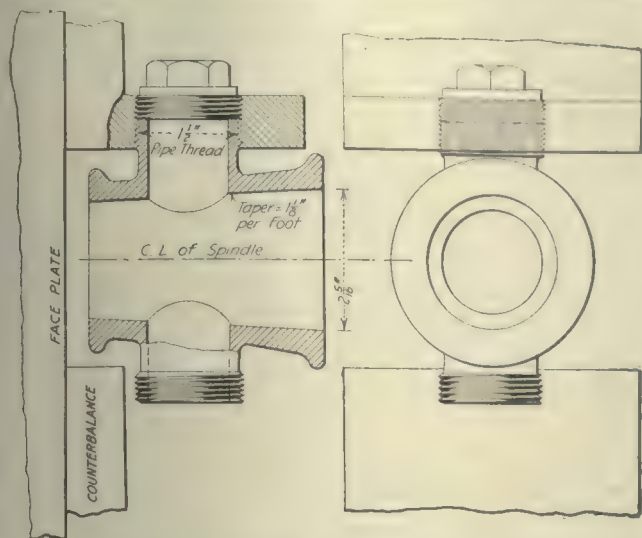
FACE PLATE FEATURE FOR HOLDING VALVES
